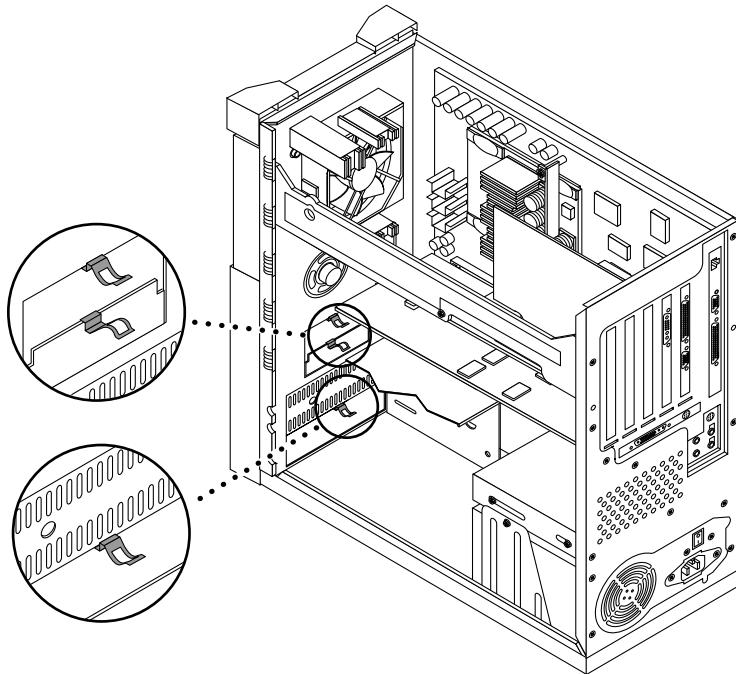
Removing the CD-ROM Drive and Floppy Drive Bracket
